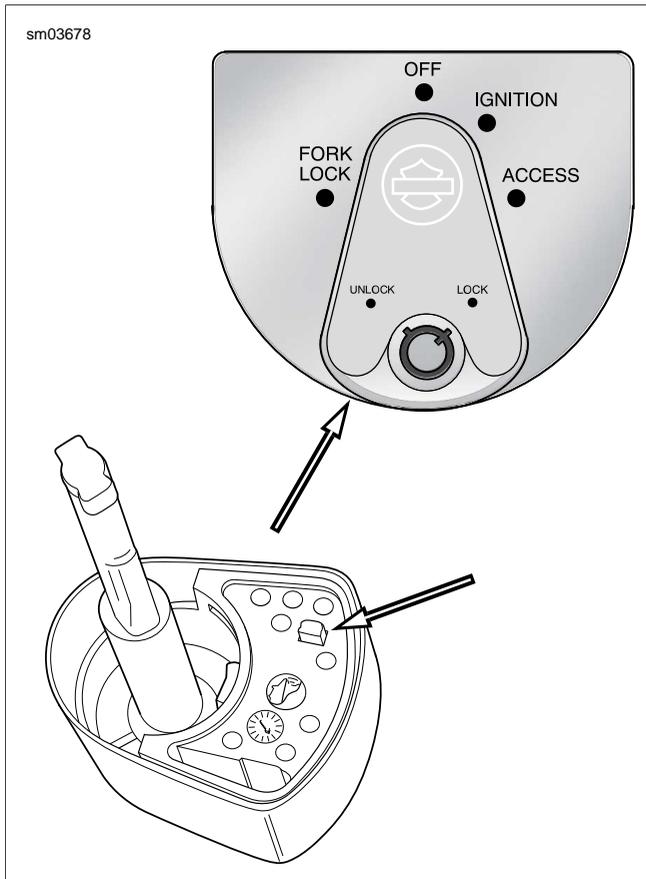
Ignition Switch Knob Release Button (Top and Bottom Views)
